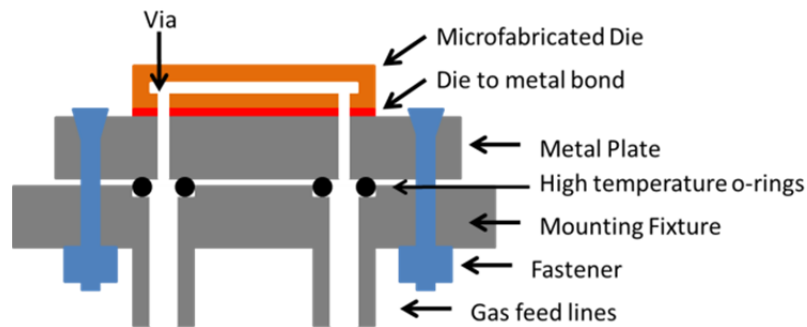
Diagram of sealing mechanism between the print head and chamber.
